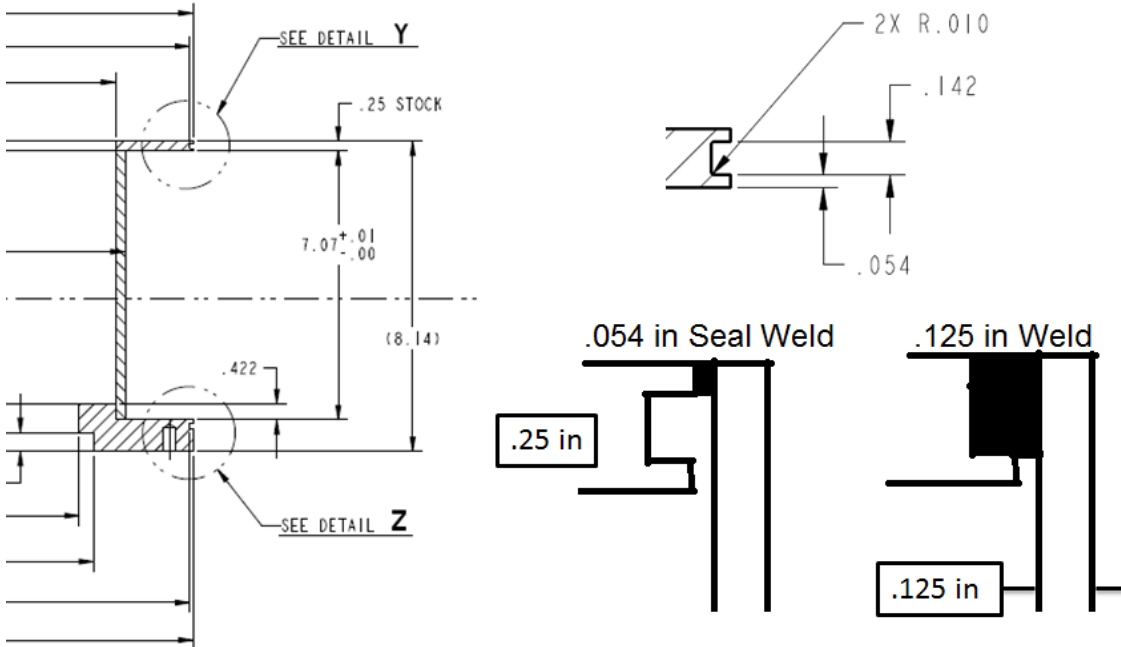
Lip Seal Weld and Better, but not Adequate filled Weld
